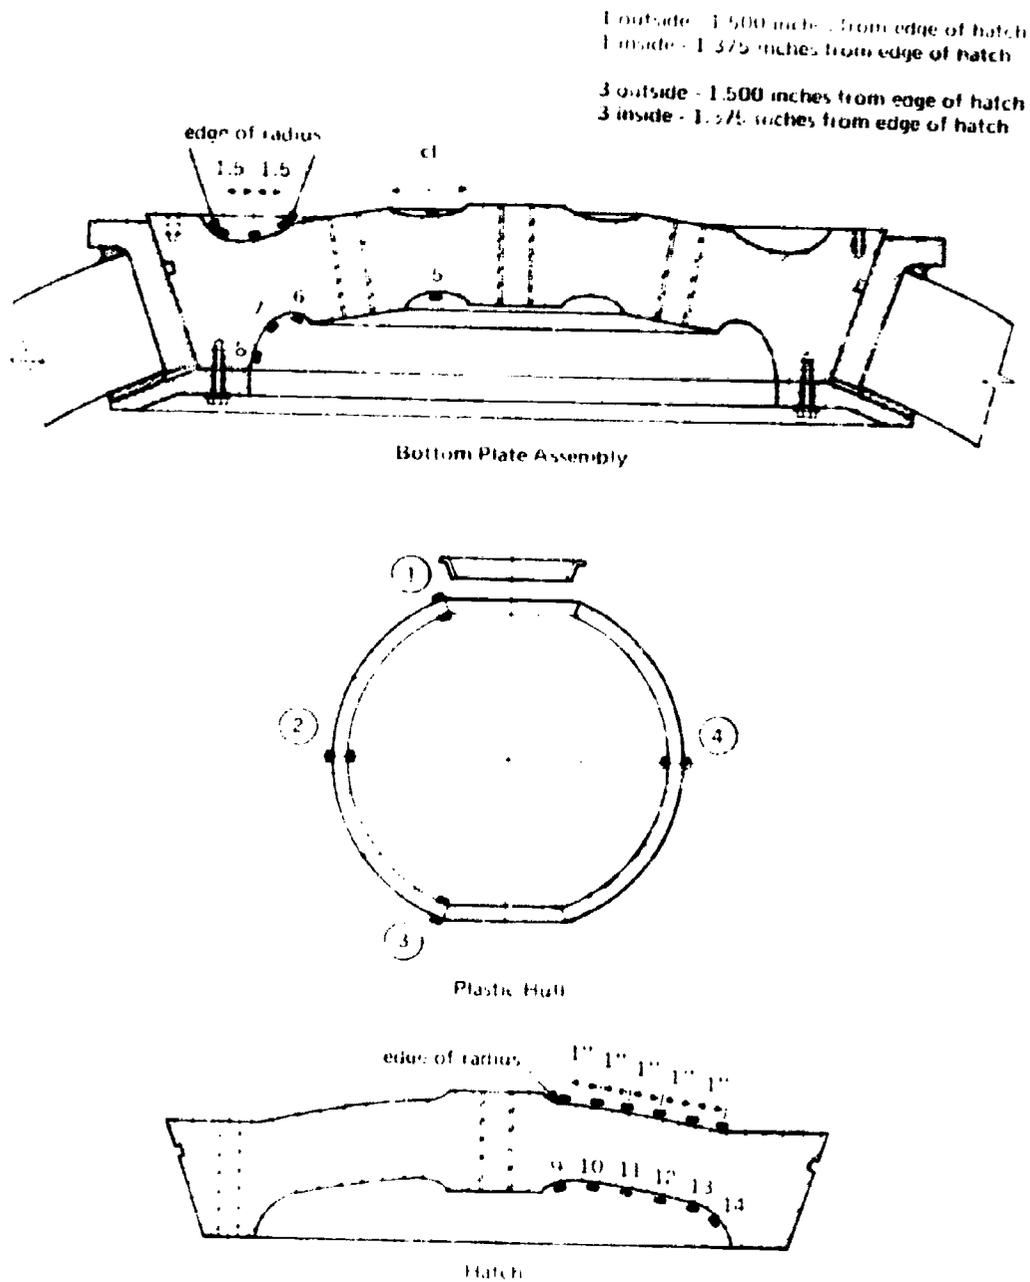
Location of strain gages on the 66 inch OD x 58 inch ID full scale Model 2000 Nemco Hull assembly.
